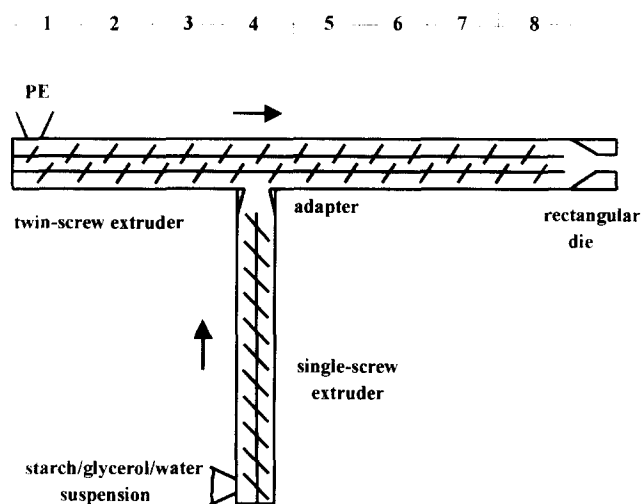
Diagram of the combined co-rotating twin-screw extruder and single-screw extruder
